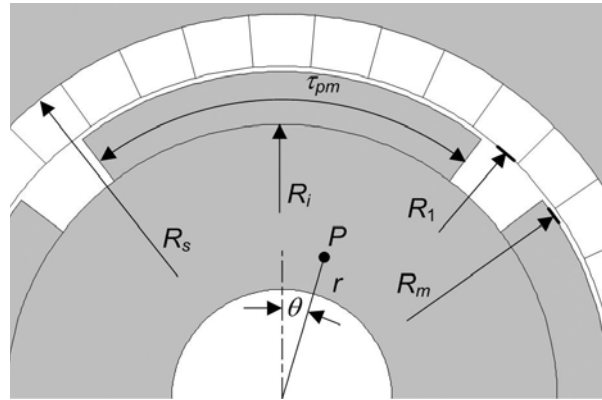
Characteristic dimensions for a slotless SPM machine.
